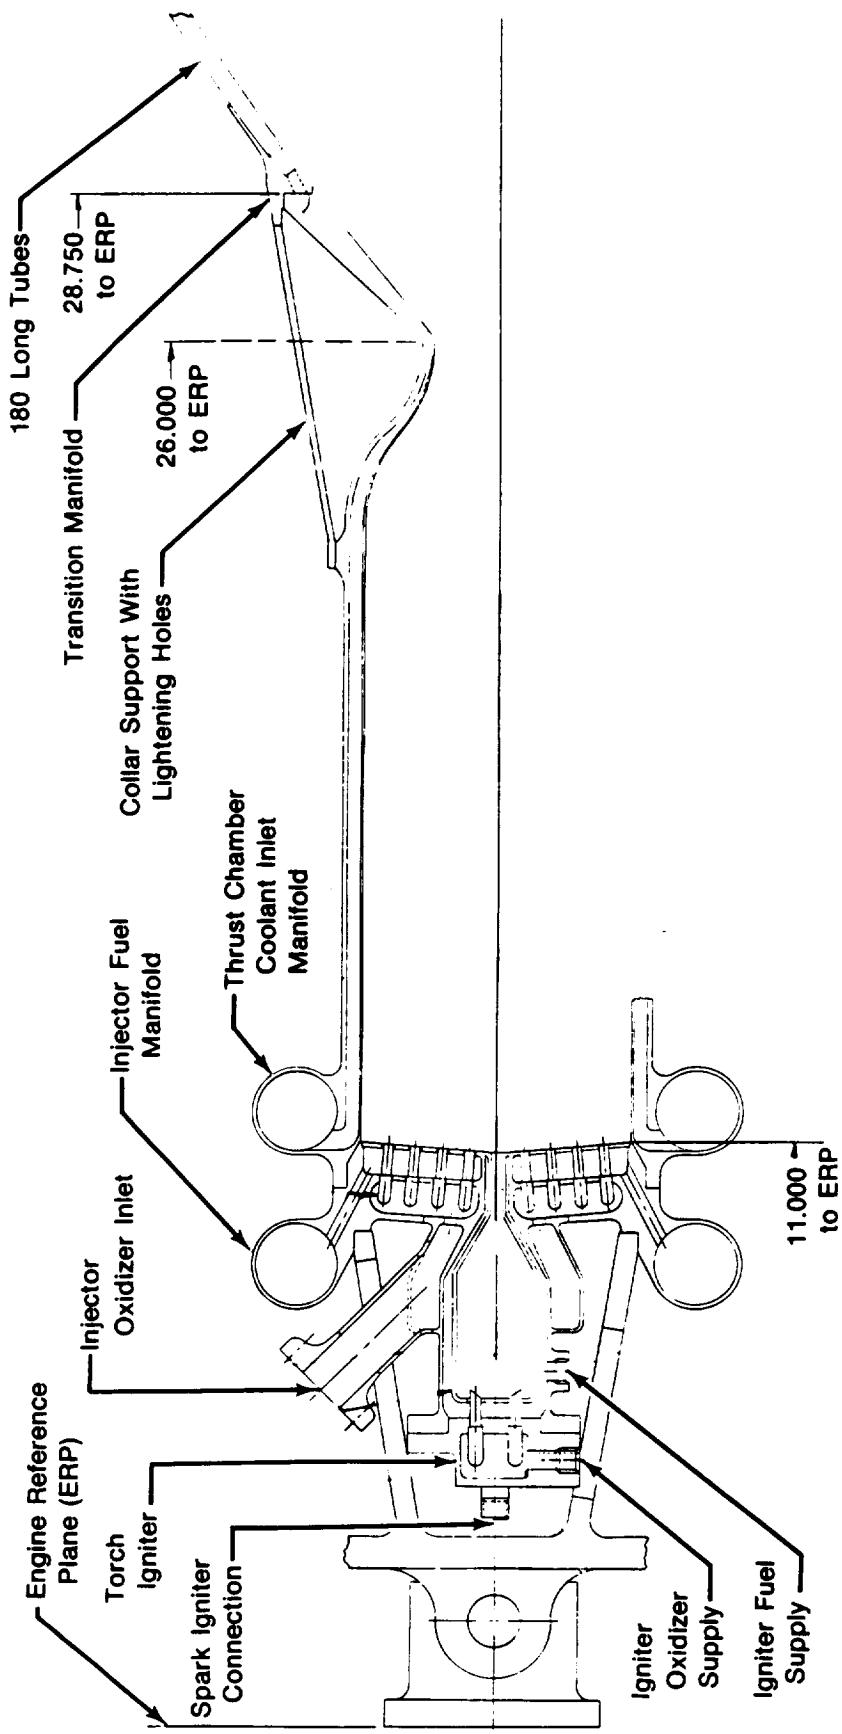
Injector, Igniter and Thrust Chamber Assembly
